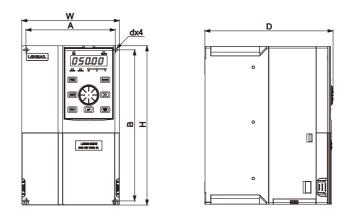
Outline and mounting dimensions of LS680T11GB to LS680T18GB, and LS680-2T5.5GB to LS680-2T7.5GB
